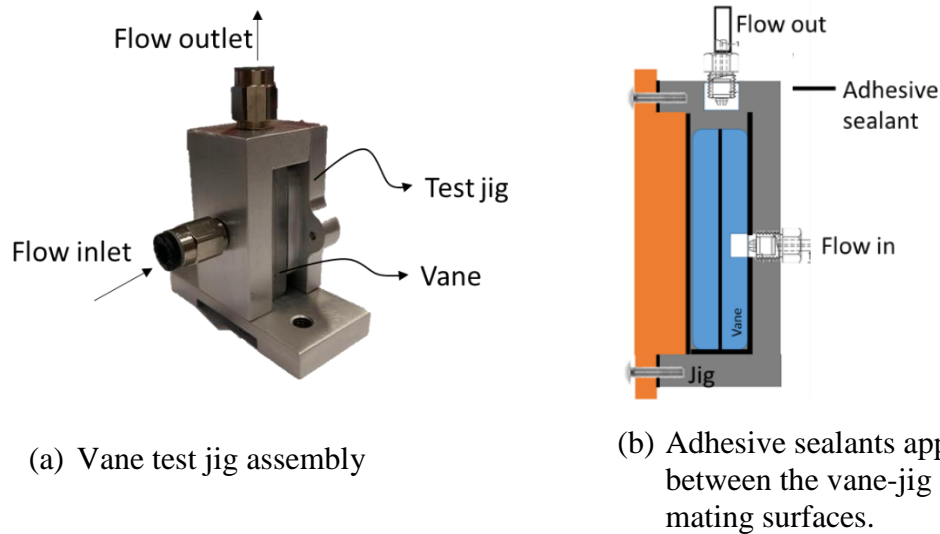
(a) Vane test jig assembly, (b) Adhesive sealants prevent leakage between the mating surfaces
